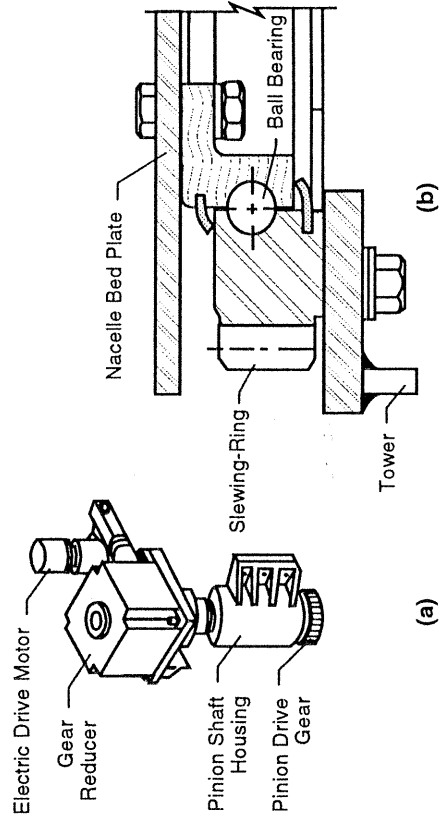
Schematic diagram of a motor-driven yaw system. (a) Electric or hydraulic motor drive and pinion gear (b) Bull gear and yaw bearing assembly
